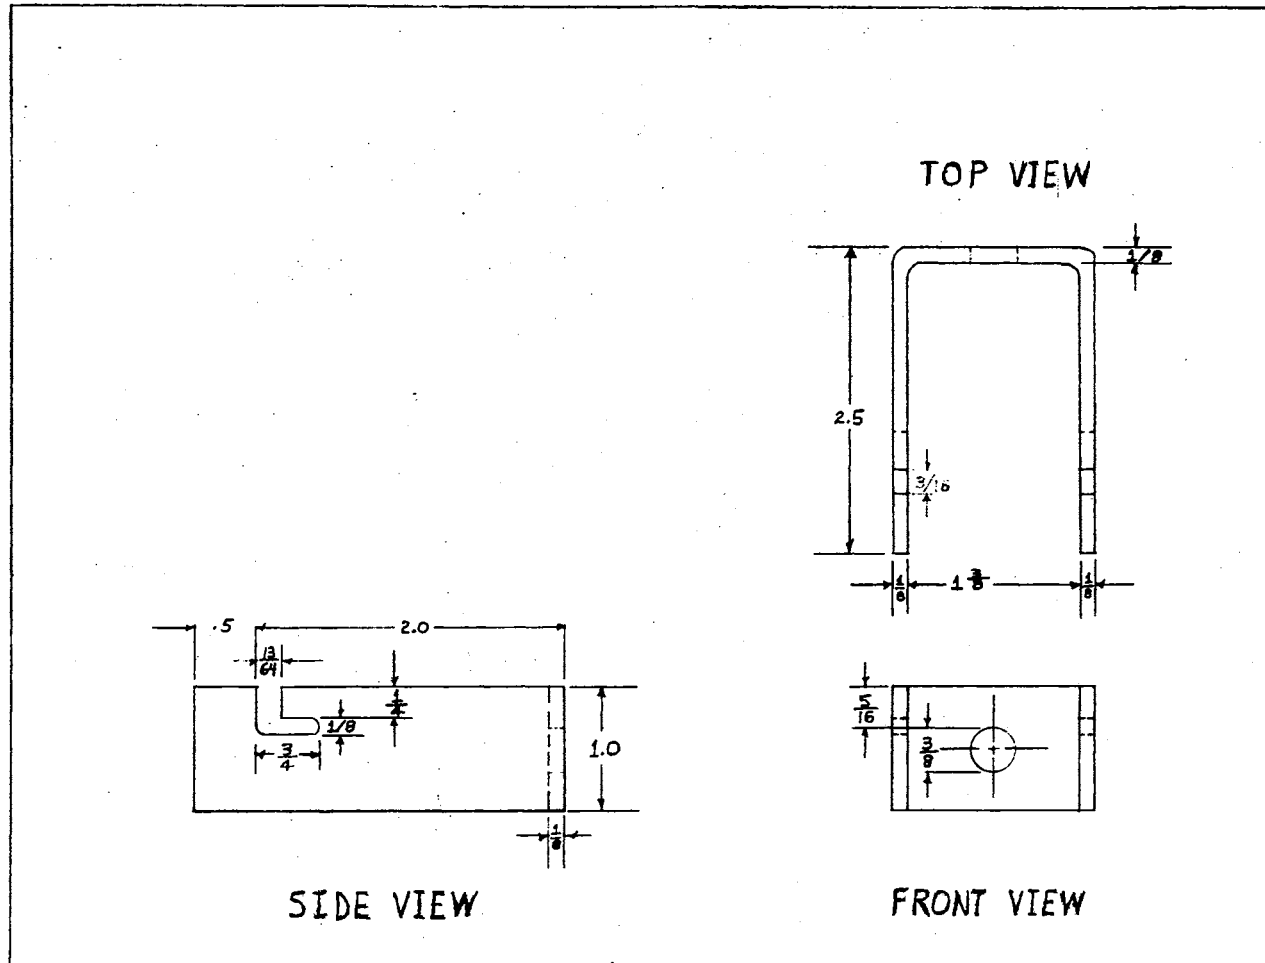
Detailed Dimensioned Drawing of the Hanging Rack for the 25 ml Evaporative Dosimeter
